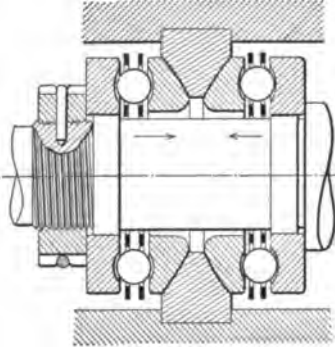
Thrust Load in Two Directions on Two Collar Bearings.
